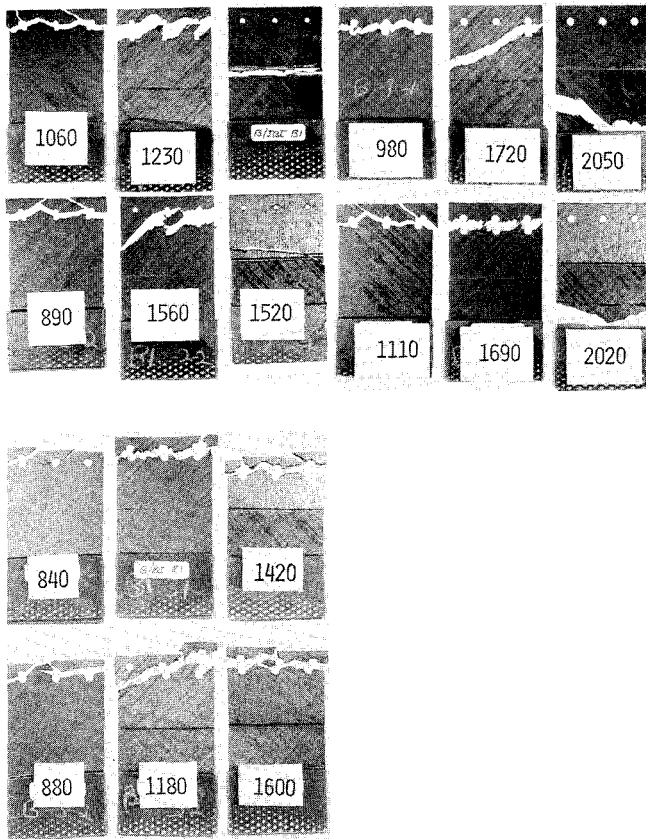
Fractured triple-bolted joint specimens, designed to promote a) bearing, b) tensile or c) end rupture failures. Specimen width is 2.25 in.
